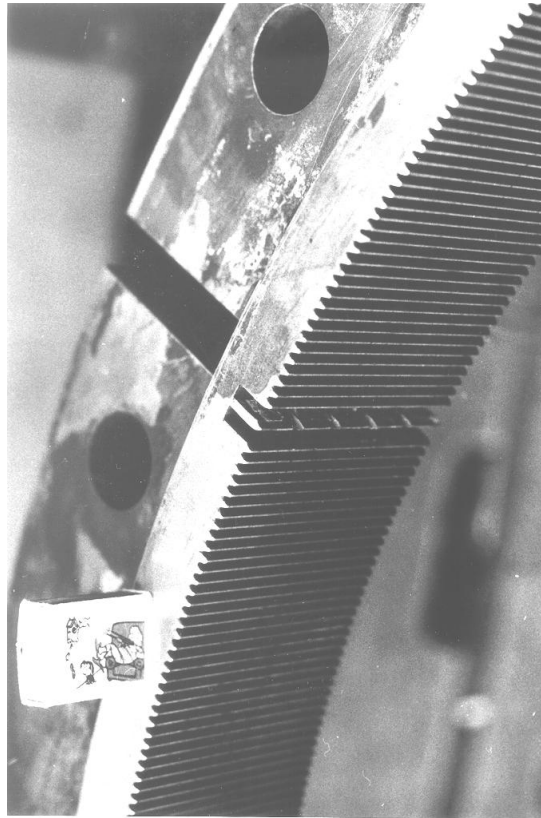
Localized tooth elements of rigid wheel tilt gear of MP-600AC mobile mixer
